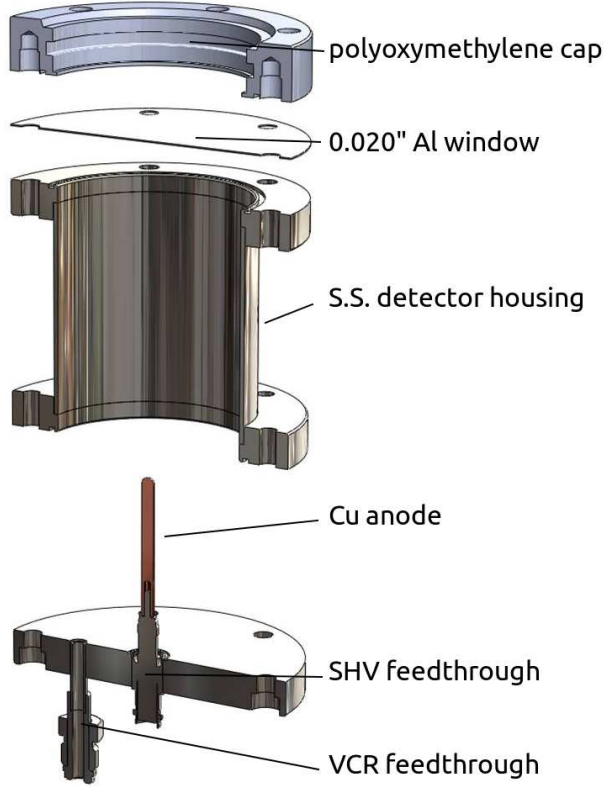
A schematic of the UCN detector assembly. The bottom plate, aluminum window, and polyoxymethylene cap are sealed with o-rings.
